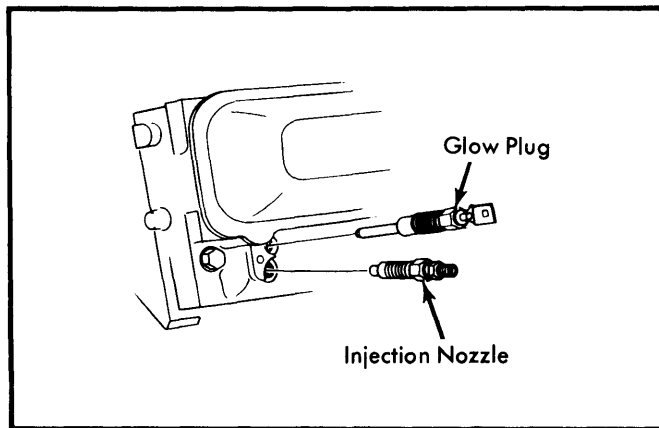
Glow Plug & Injection Nozzle Location In Diesel Engine Cylinder Head
